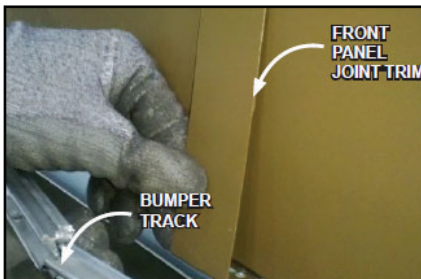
Front panel trim is install behind bumper tracks. (Example shown with a bumper track. Location and style of track plus bumper [if ordered] may vary.)
